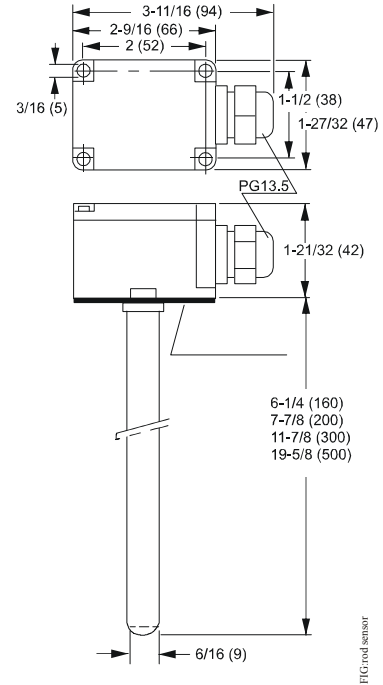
A99EY-1C Outside Sensor Dimensions, in. (mm)
